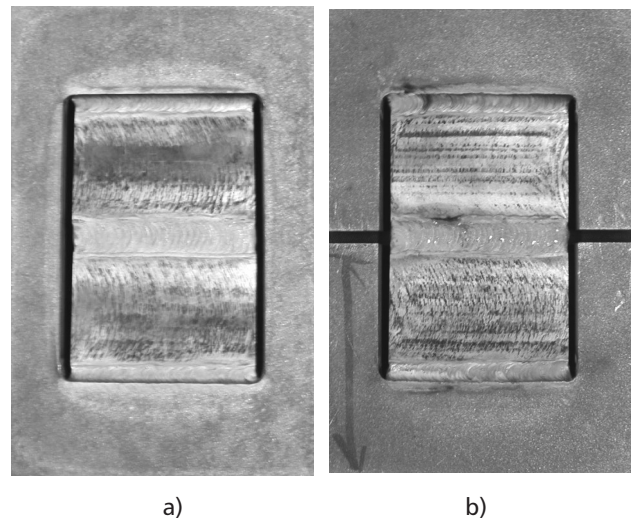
Specimens of sheets with welds. a) specimen CR in closed frame, b) specimen RR in cutted frame.
